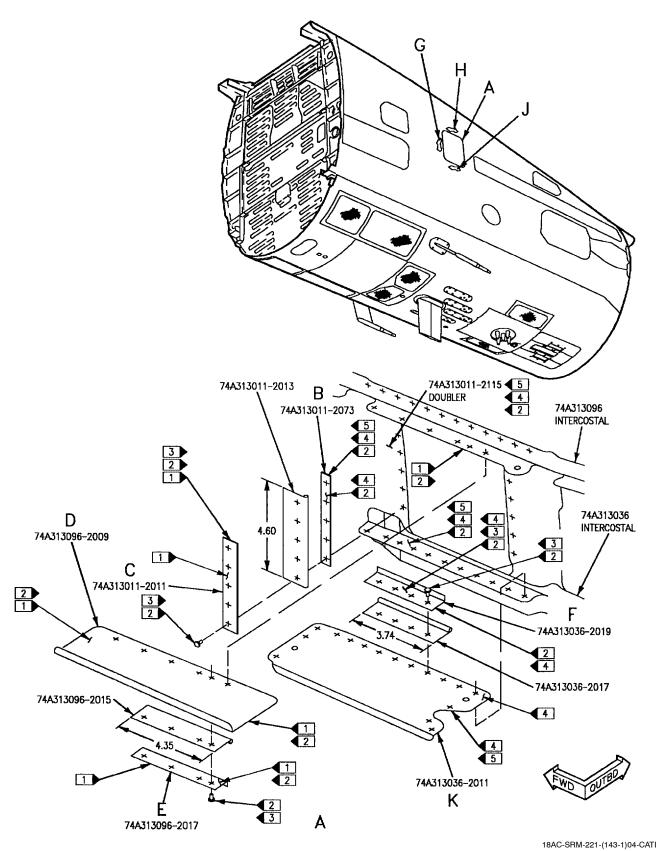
Replacement, Gun Purge Door EMI Seals (Sheet 1)
